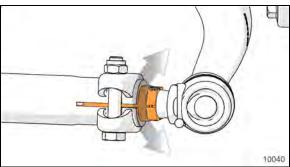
FINE ADJUSTER SLEEVE ON TIE ROD
